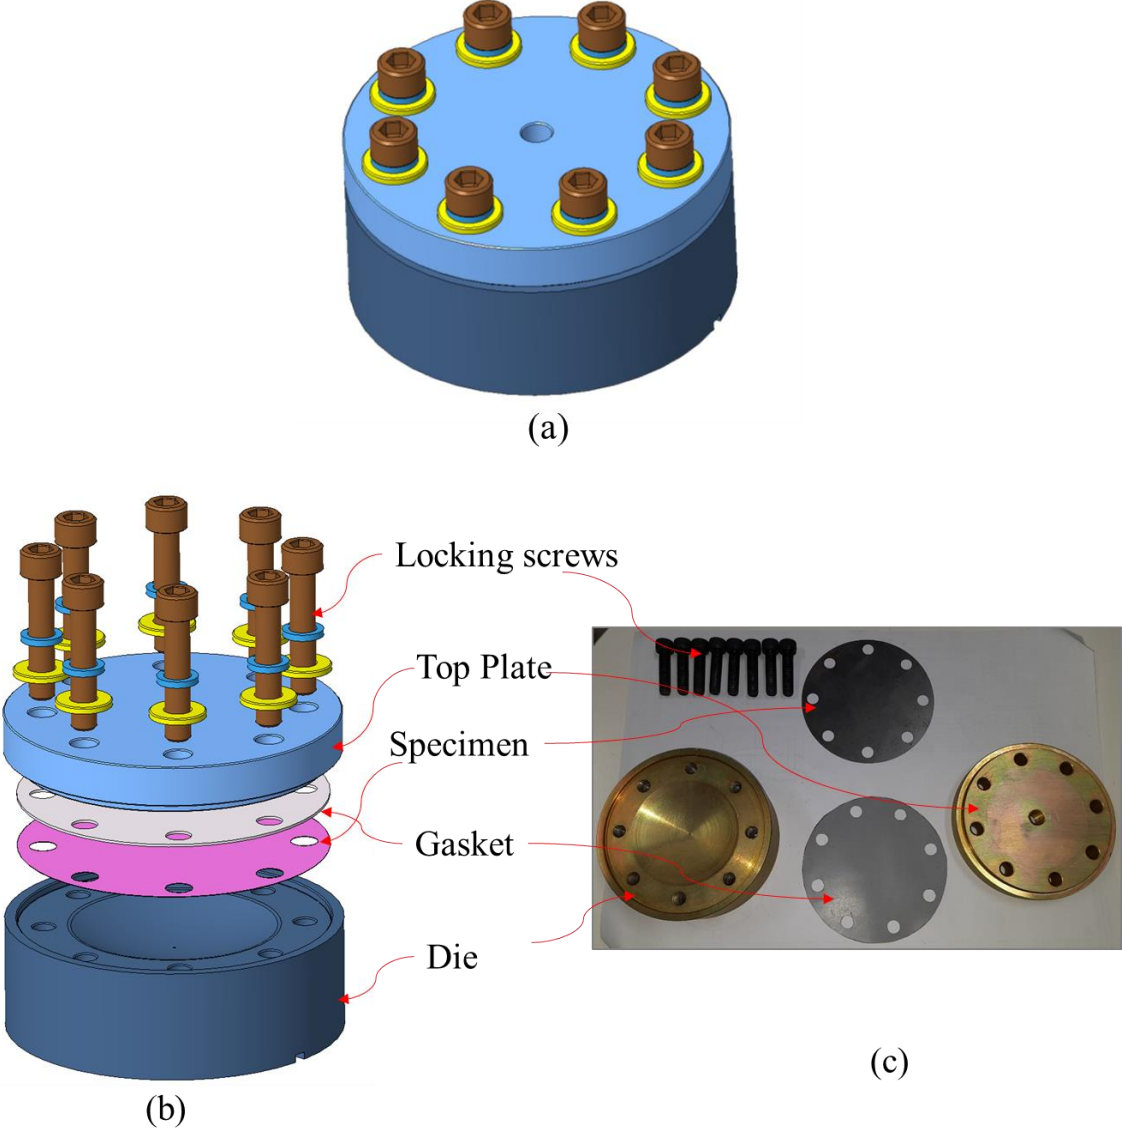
Hydro-forming setup: (a) assembly, (b) exploded view of components, and (c) individual fabricated components
